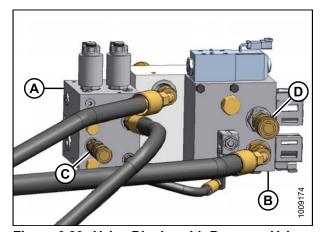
Valve Blocks with Reverser Valve Configured for Auger Header
